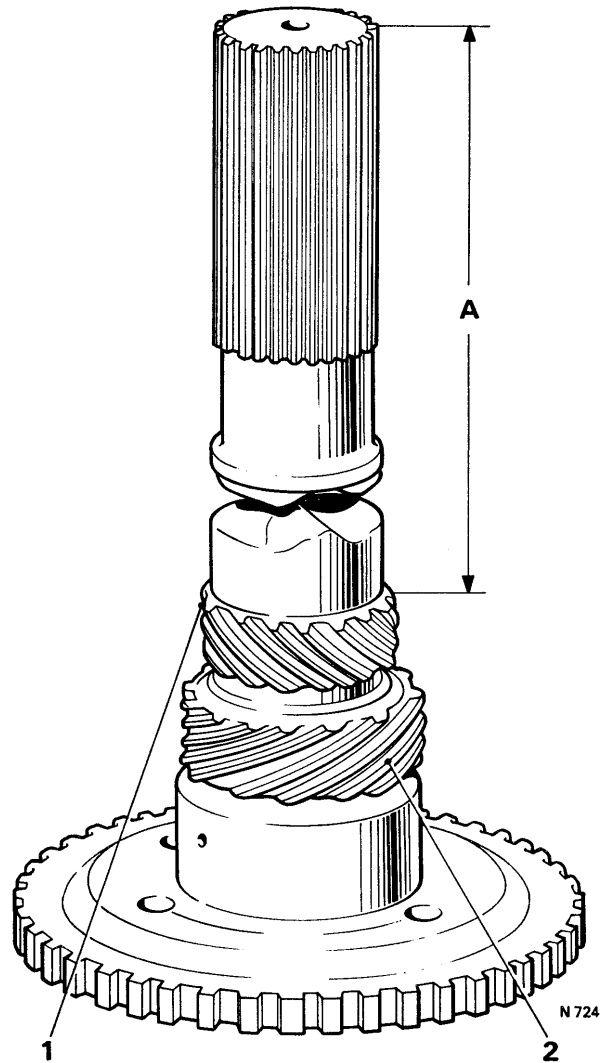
SPEEDOMETER DRIVING GEAR—FITTED
